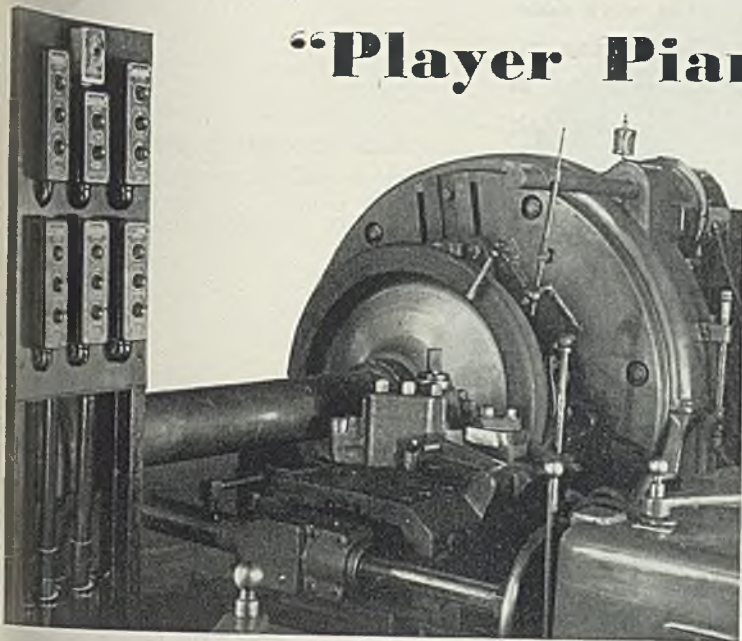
Right-hand carriage of lathe, of which there is a duplicate at the left-hand head, showing tool turret and portion of operating mechanism. Truncated cone cutter at left side of turret is roughing tool, while flat blade at right is for finishing
